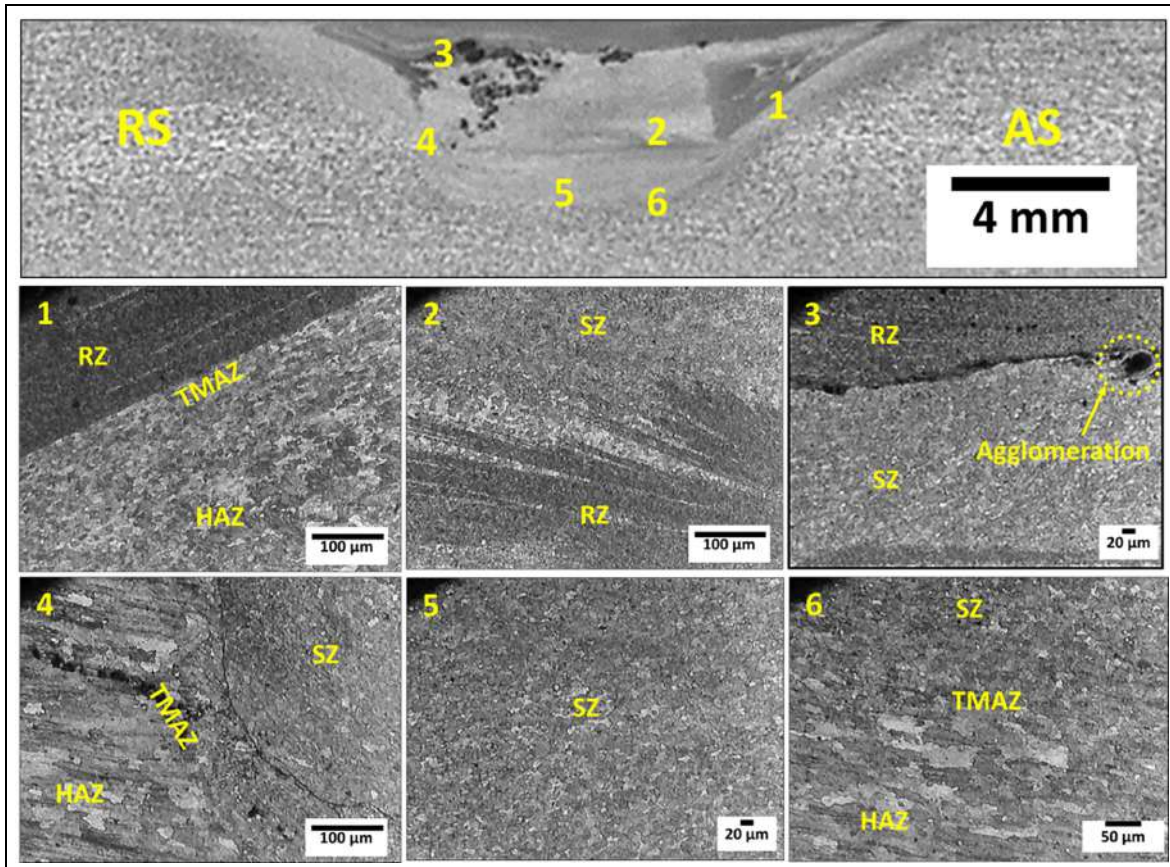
Macroscopic image of sample DP5 and several locations of welding zone.
